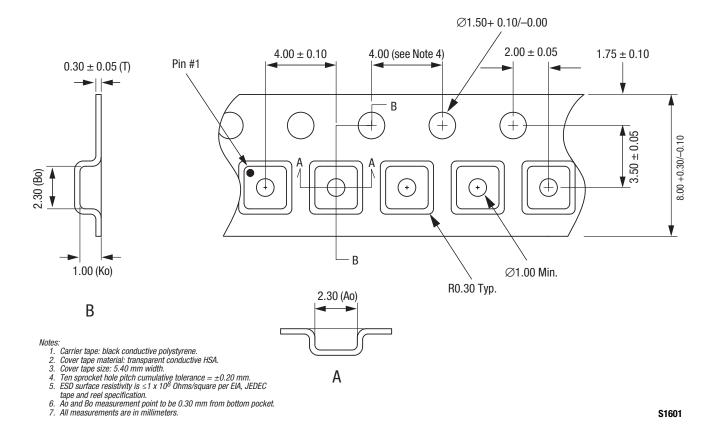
SKY67159-396LF Tape and Reel Dimensions
